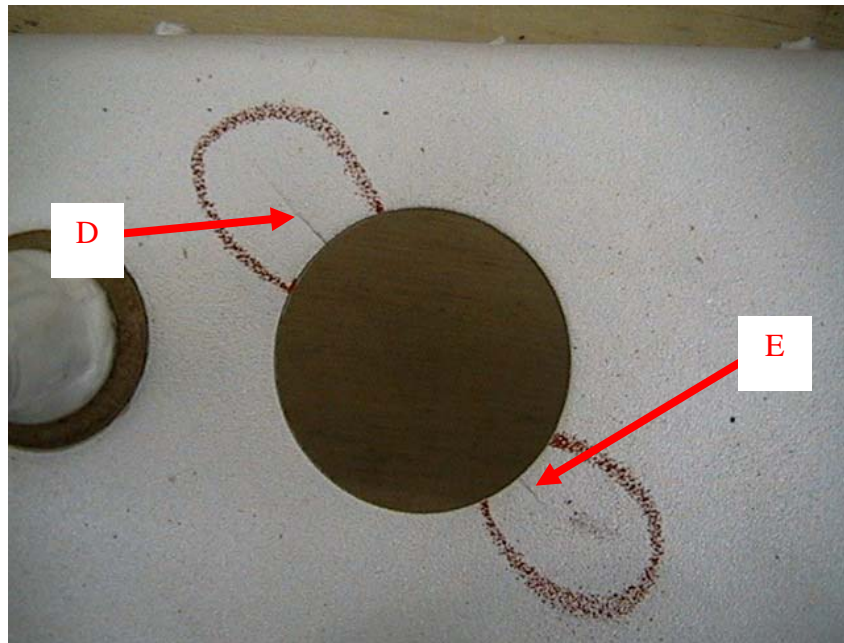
Cracks Around Lightening Hole on the Cessna 402A Left Wing Forward Auxiliary Spar
